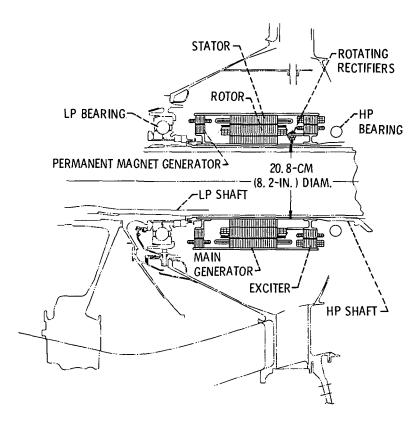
Wound-rotor, rotating-rectifier generator in large turbofan engine.
